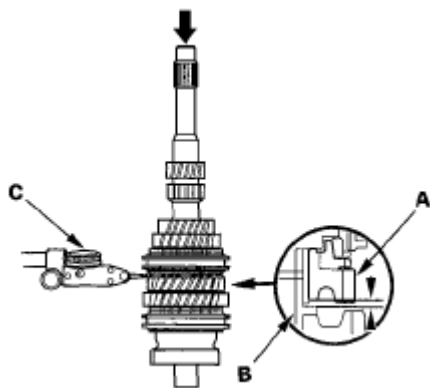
Measuring Clearance Between 4th Gear And Distance Collar With Dial Indicator
